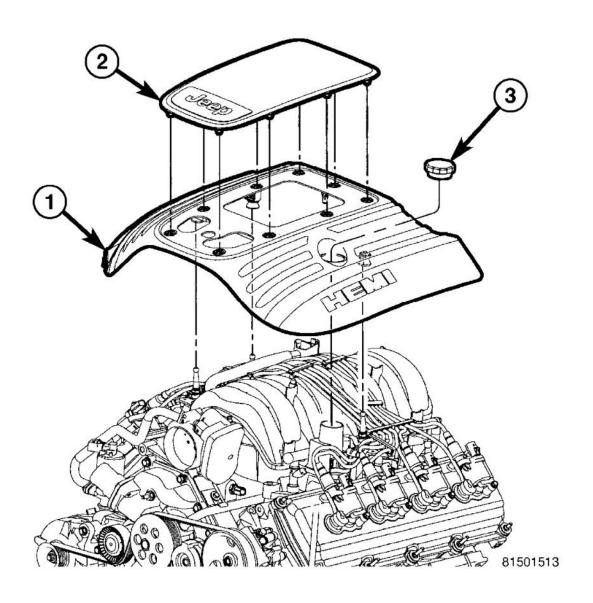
5.7L Engine Appearance Cover Courtesy of CHRYSLER LLC
